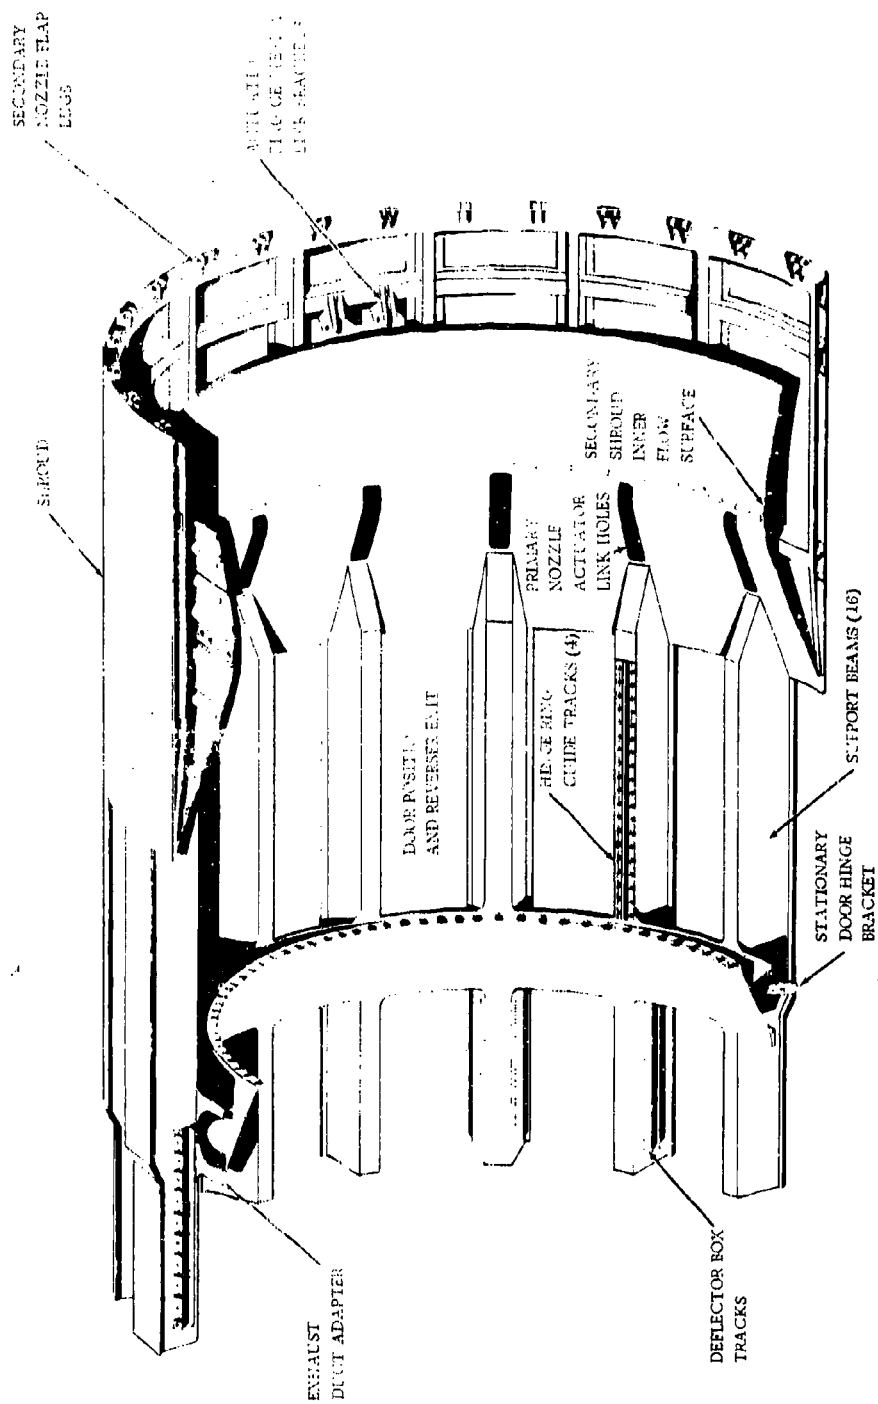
SHROUD AND BEAM ASSEMBLY
